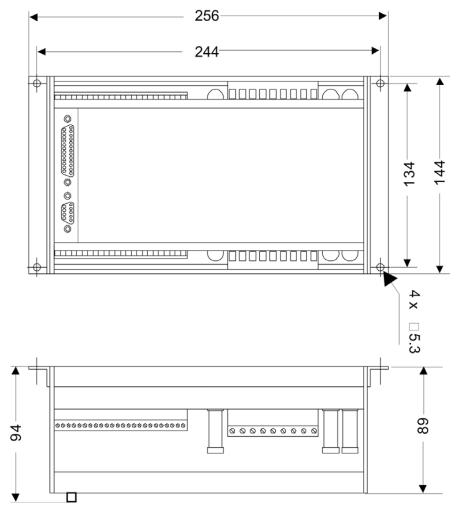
Dimensional drawing ETAMATIC OEM / ETAMATIC S OEM
